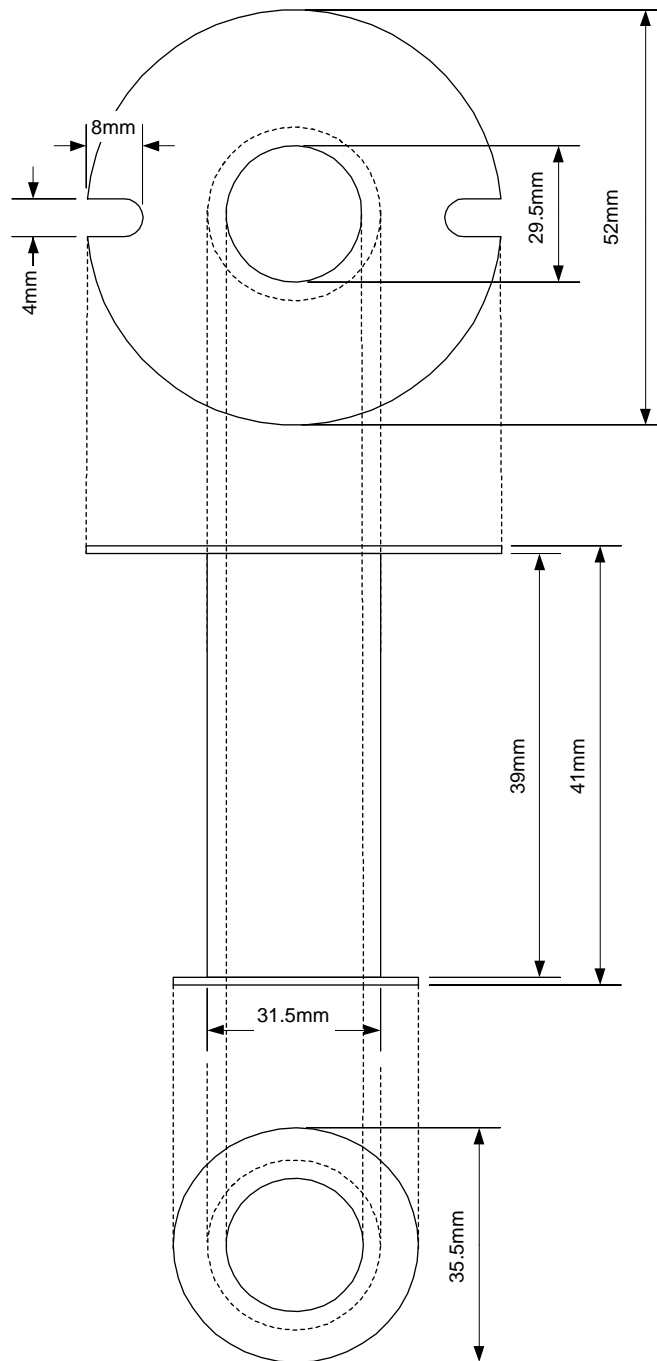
The mechanical layout of the custom made inner coil former used for the secondary winding of the coaxial windings arrangement.
